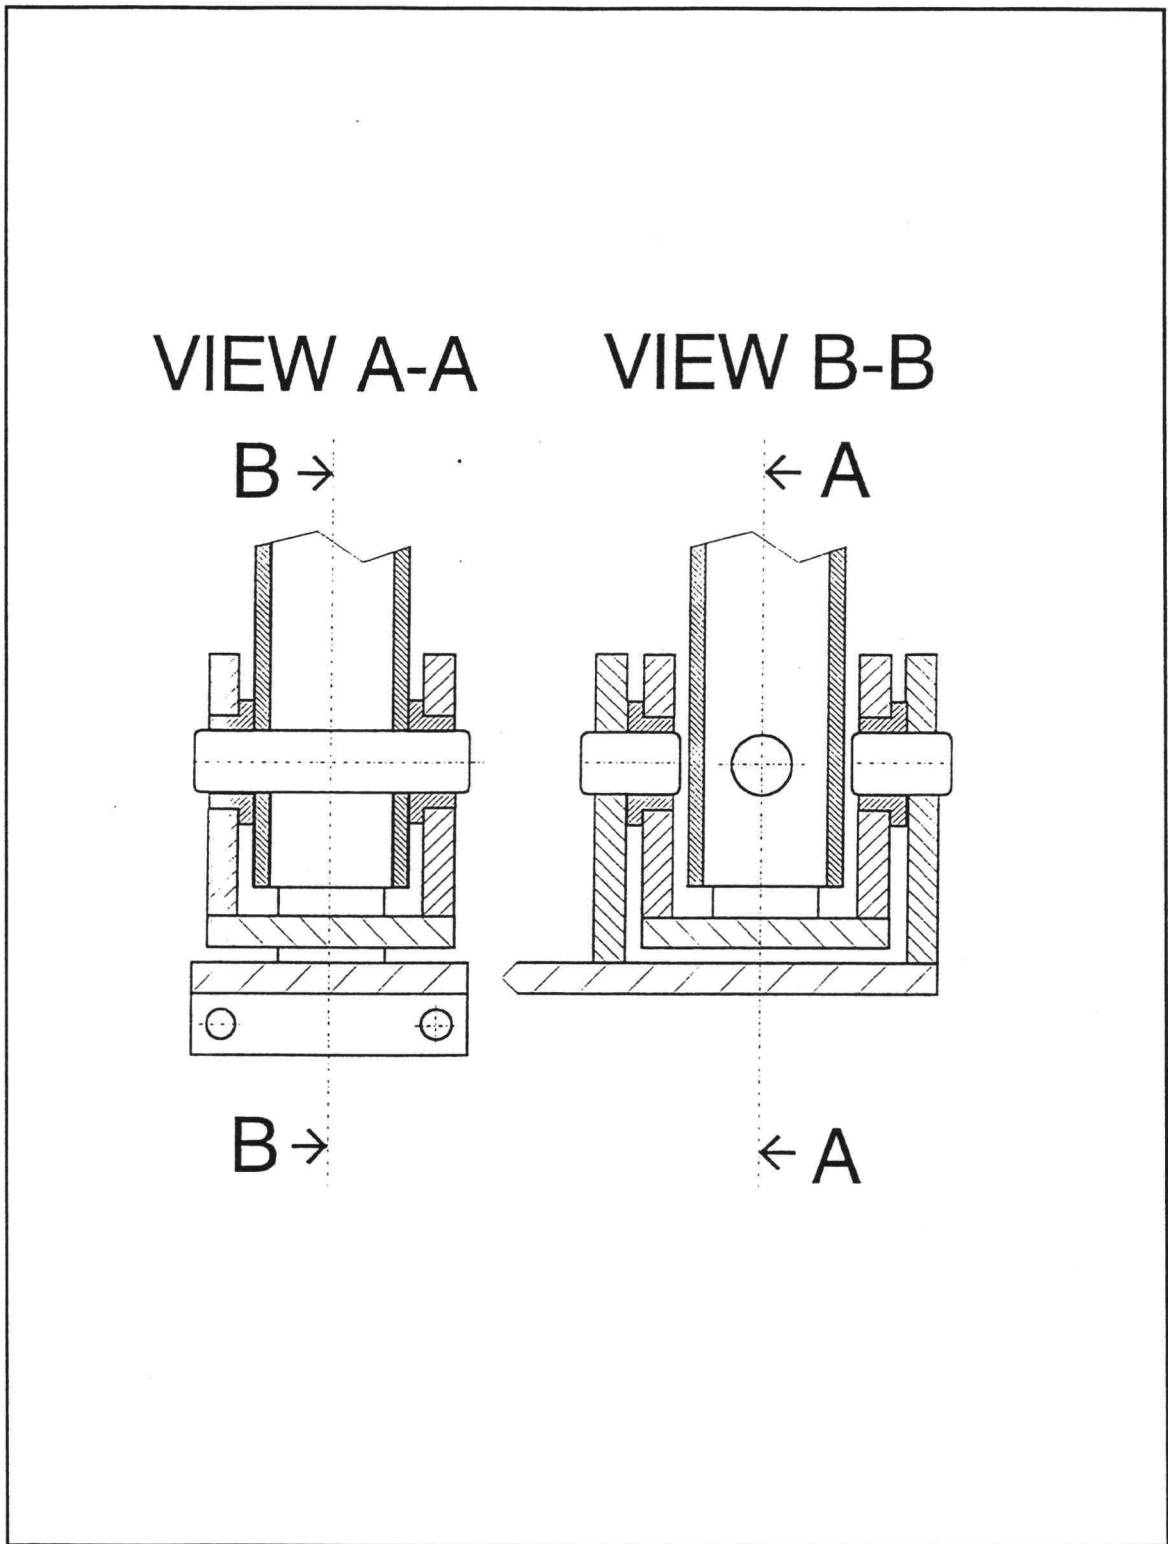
Drawing 7: Alternative 2 View A-A and B-B
